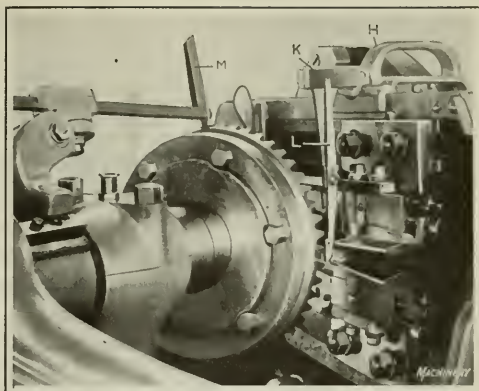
Gages used for setting Gear in Correct Position for cutting
